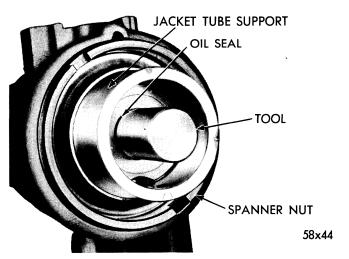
Installing Worm Shaft Upper Oil Seal With Tool C-3650
